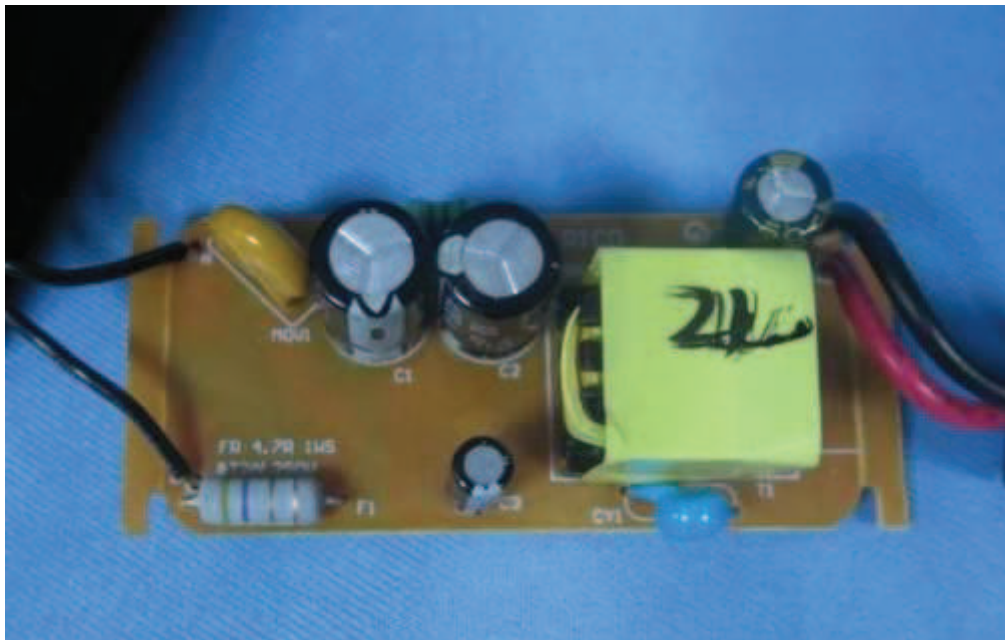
Component side view of RKPO-zzxxxyyy-D2 (after removed glue)
